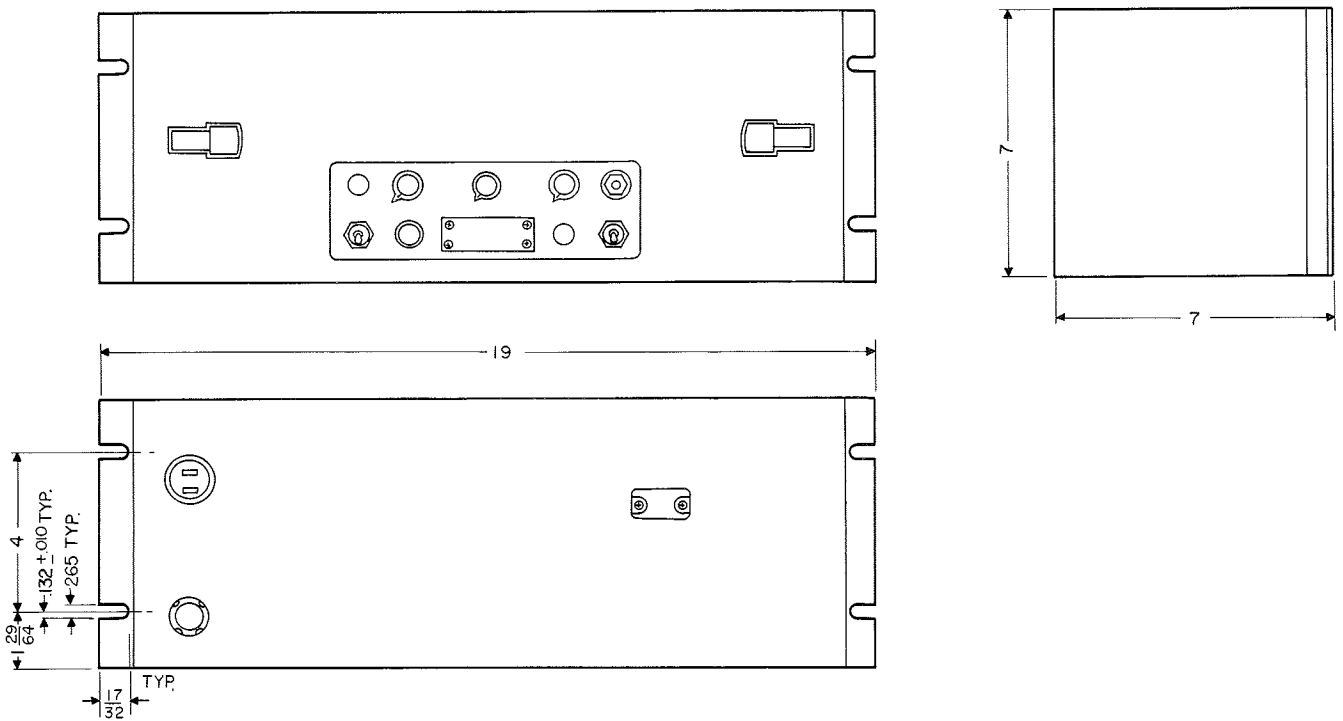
Outline and Mounting Dimensions, 51N-7R, Recessed Mounting
